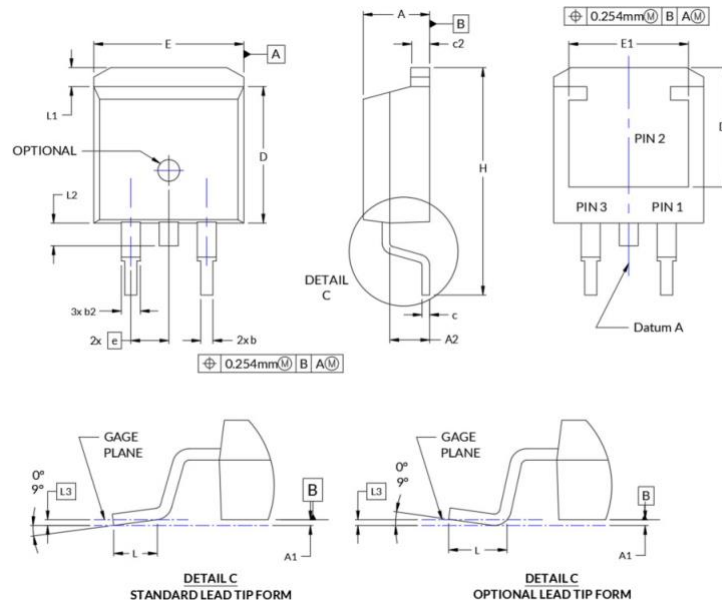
D2PAK-3L (TO-263-3L) package outline drawing.
